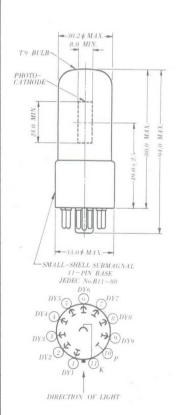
DIMENSIONAL OUTLINES AND BASING DIAGRAMS-DIMENSIONS IN MILLIMETER
